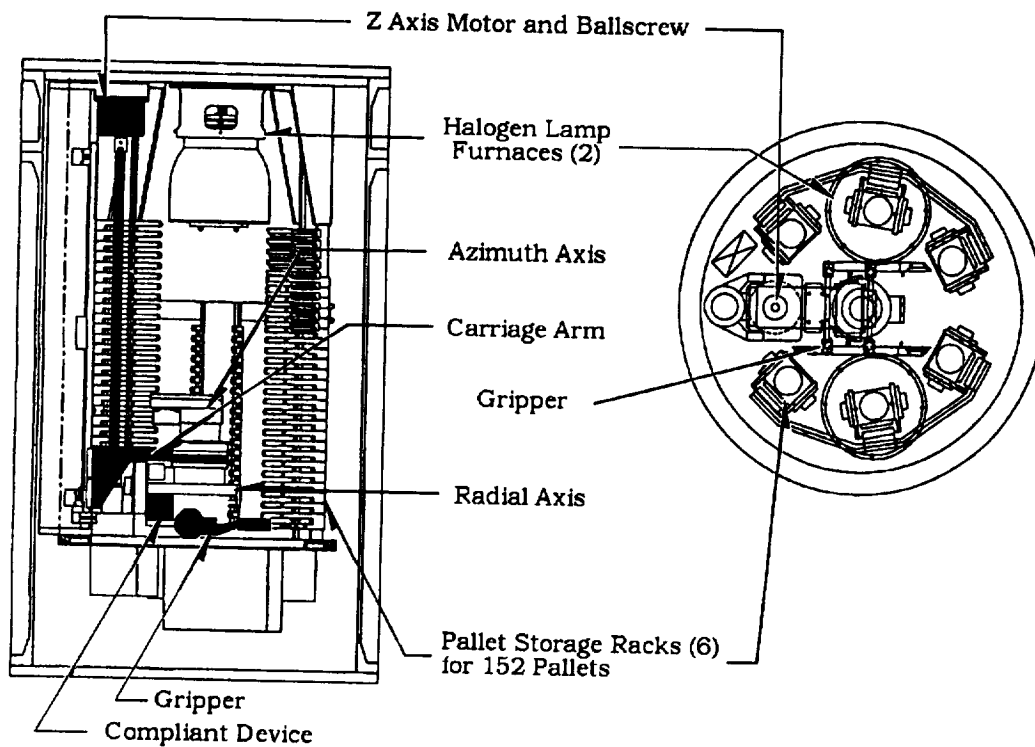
ROMPS Experiment Side And Top View Showing Robot, Furnace, Sample Racks With Samples, And The Location Of The Gripper and the compliant device
